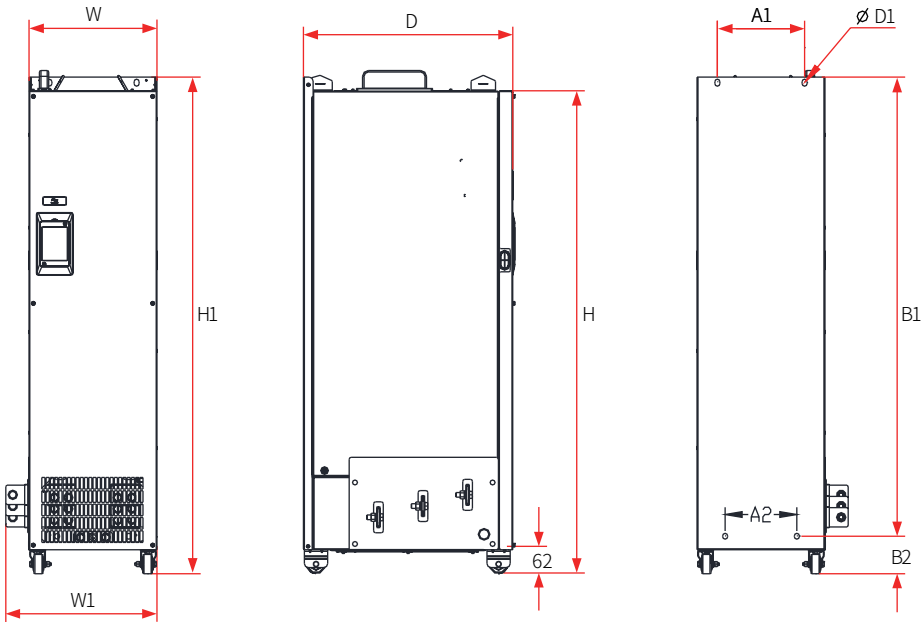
Schematic diagram of outline dimensions and mounting hole dimensions of MD050NT200G to MD050NT400G models
